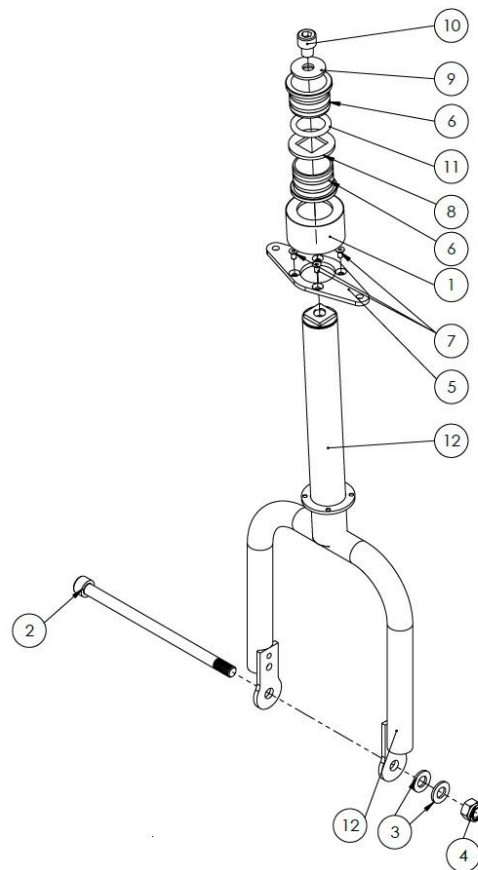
Cavalon Tundra front wheel fork orientation: Nose of the aircraft faces to the right
